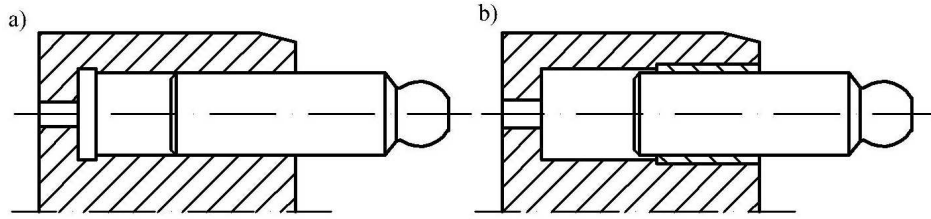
Piston moving in: a) sleeveless cylinder, b) sleeved cylinder
